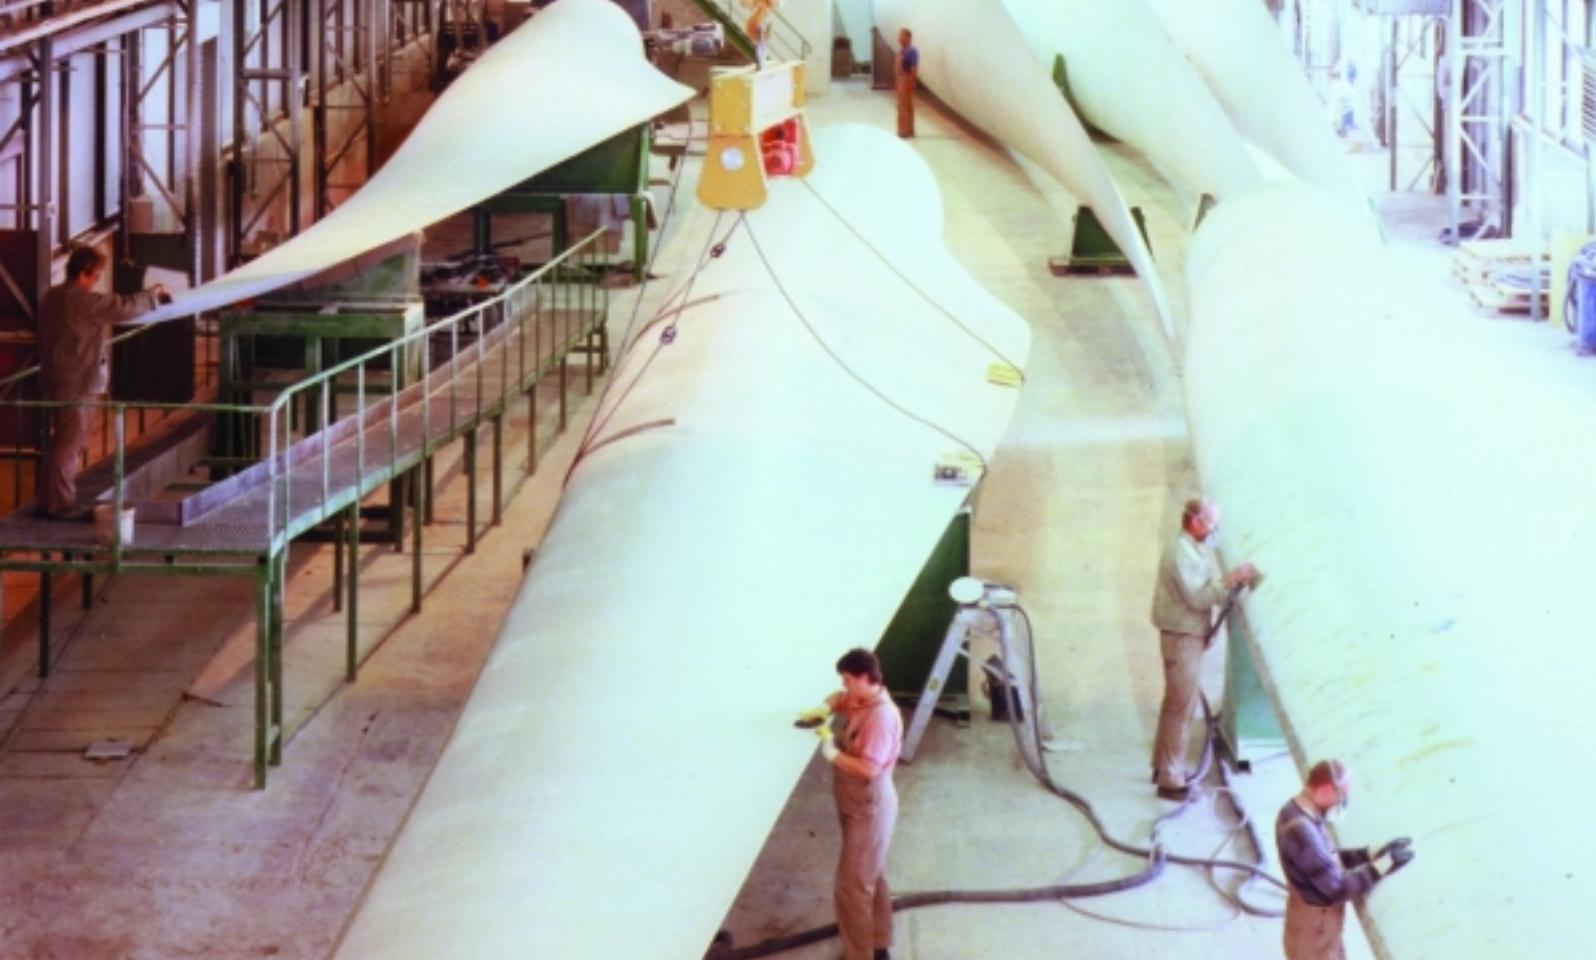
Rotor blade production at NOI-Rotortechnik GmbH
